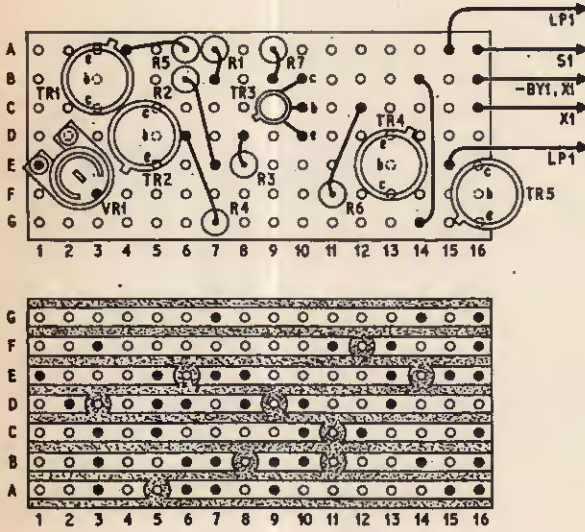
Veroboard assembly showing top view arrangement of components and breaks in conductor strips
